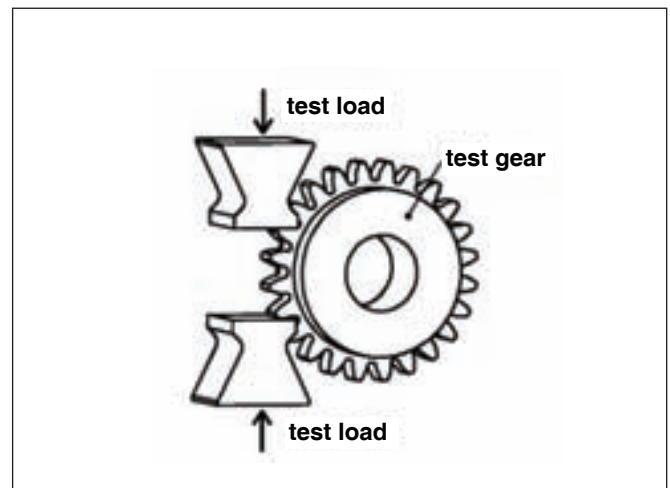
Testing scheme without supporting the gear blank (Ref. 11).
